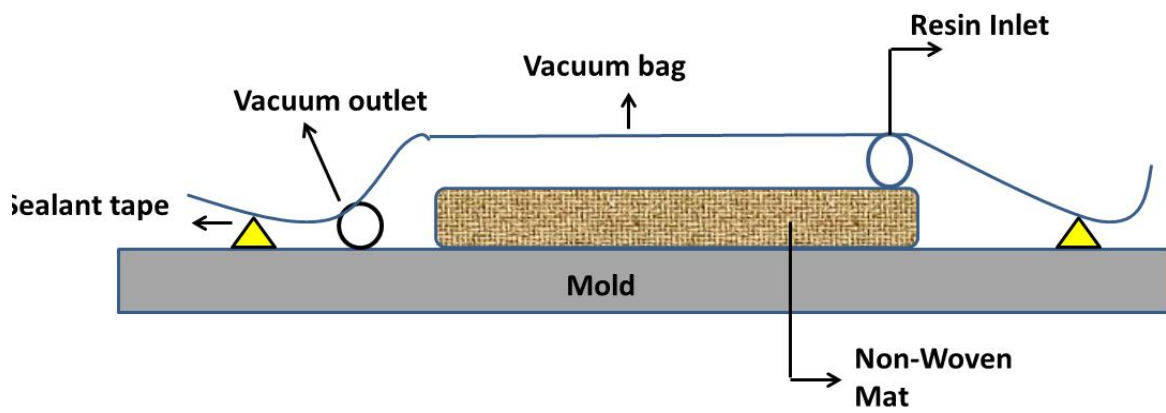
Vacuum Assisted Resin Transfer Molding
